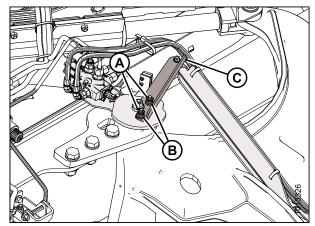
Transport Deploy/Swing Mechanism Assembly
